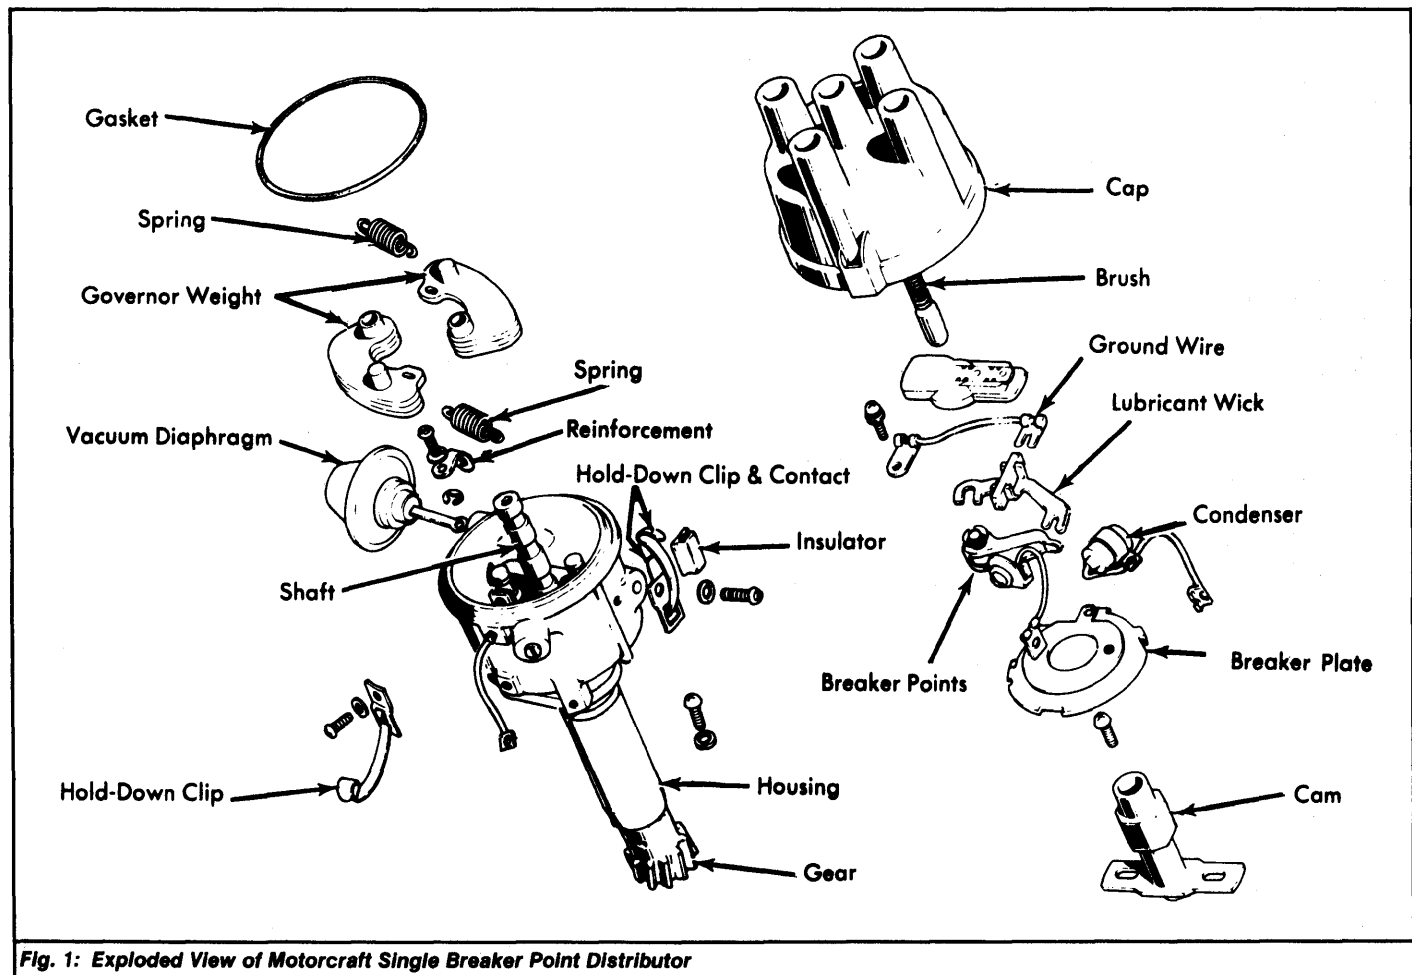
Exploded View of Motorcraft Single Breaker Point Distributor
